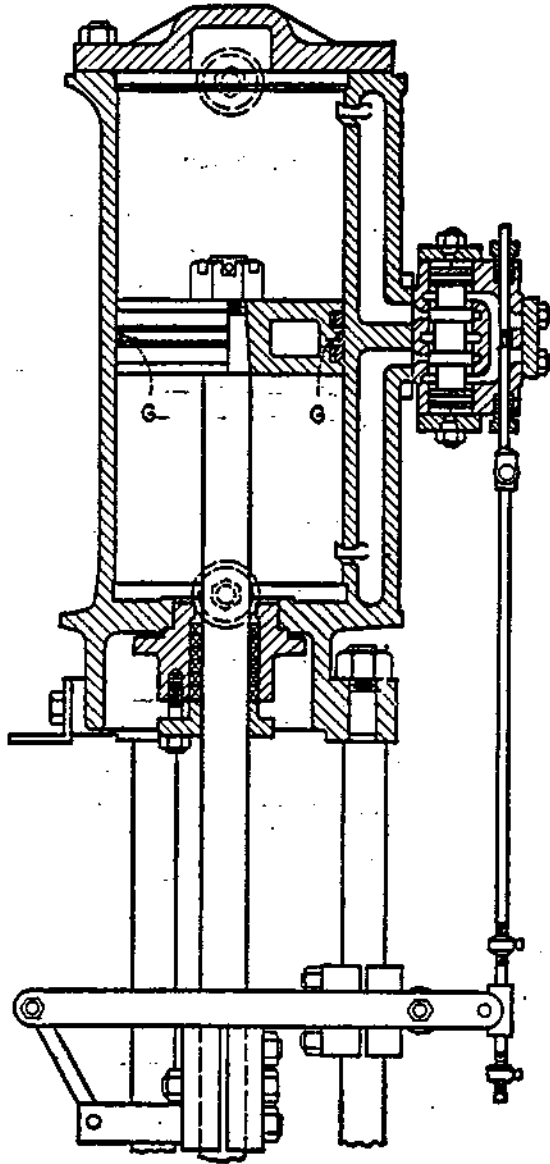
Vertical simplex steam cylinder with grooved piston.
